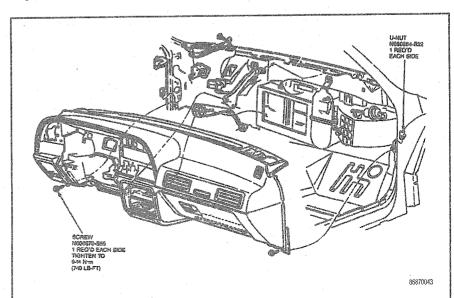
View of the instrument panel assembly and mounting bolt locations—typical
